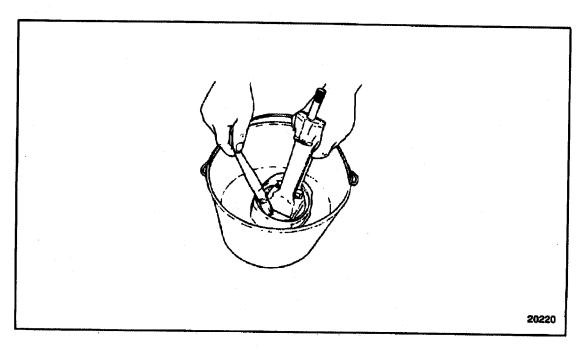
Piston and Connecting Rod Assembly Lubrication
